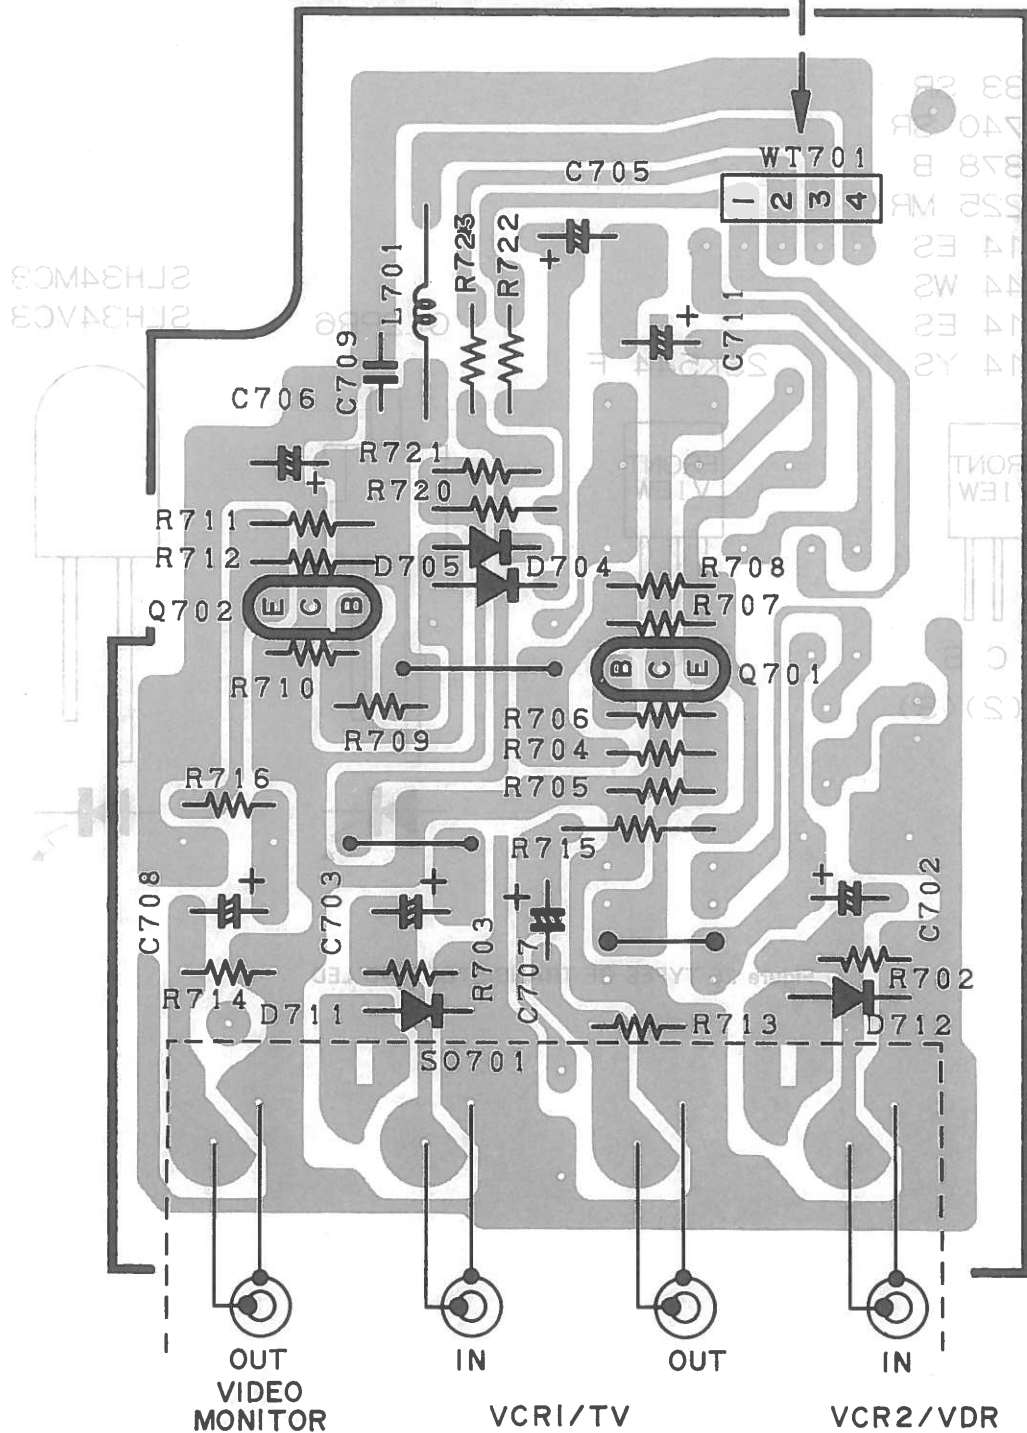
WIRING SIDE OF P.W. BOARD (4/4)
